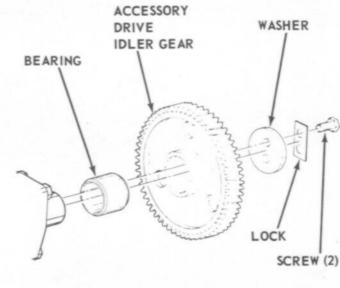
Timing gear cover and timing gears; removal and installation (sheet 1 of 2).
